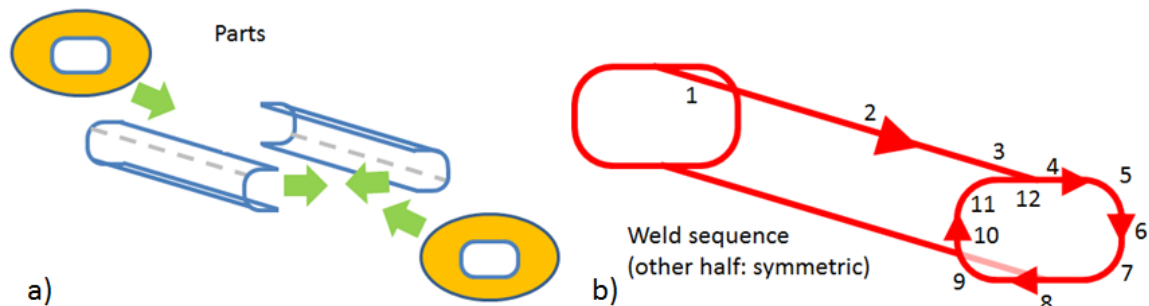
a) how the parts of the beamer (halves and ends) are put together. b) weld sections for half of the beamer, where section 1-3 is run in one and 4-12 is run in one weld
